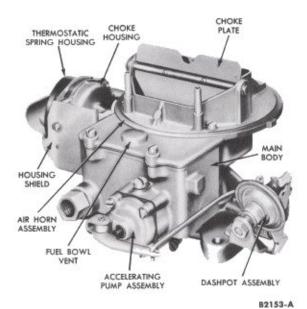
Ford Dual Carburetor—3/4 Left Front View
